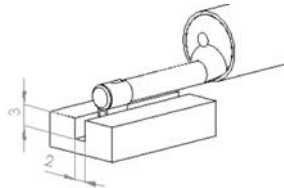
Measure groove with TS130 quirk sensor
